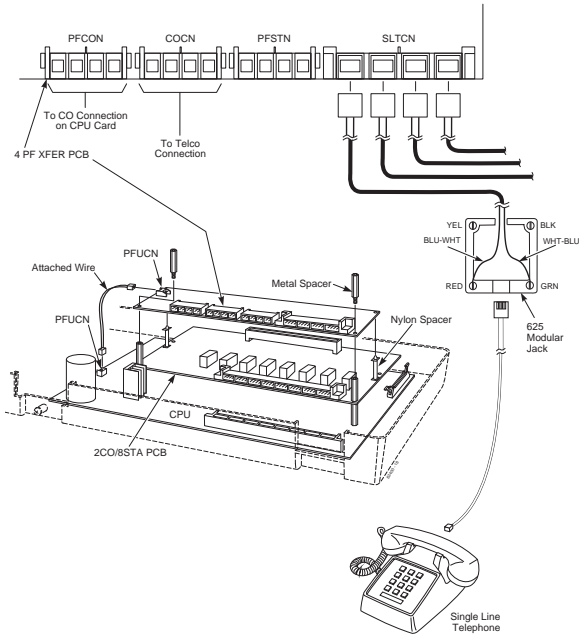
CONNECTING TO THE 4 PF XFER PCB
